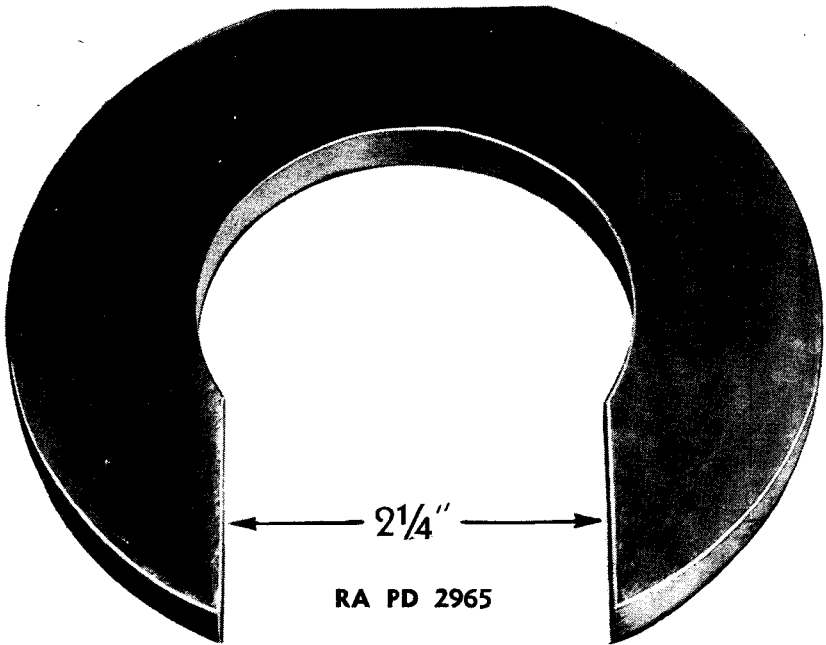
TOOL USED TO REMOVE REAR COUNTERSHAFT BEARING
